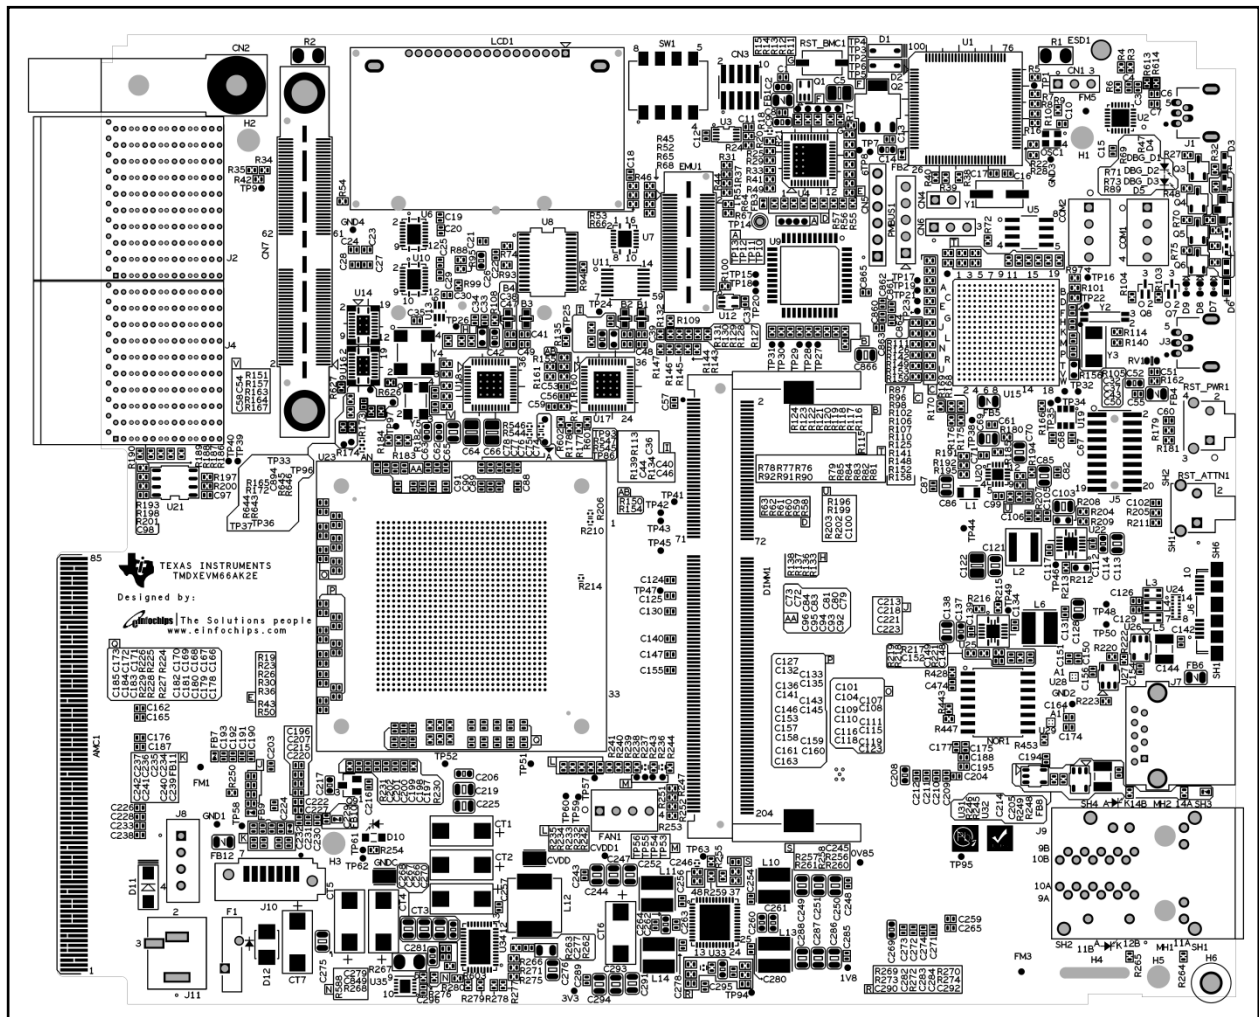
EVMK2E Board Assembly Layout – TOP view
